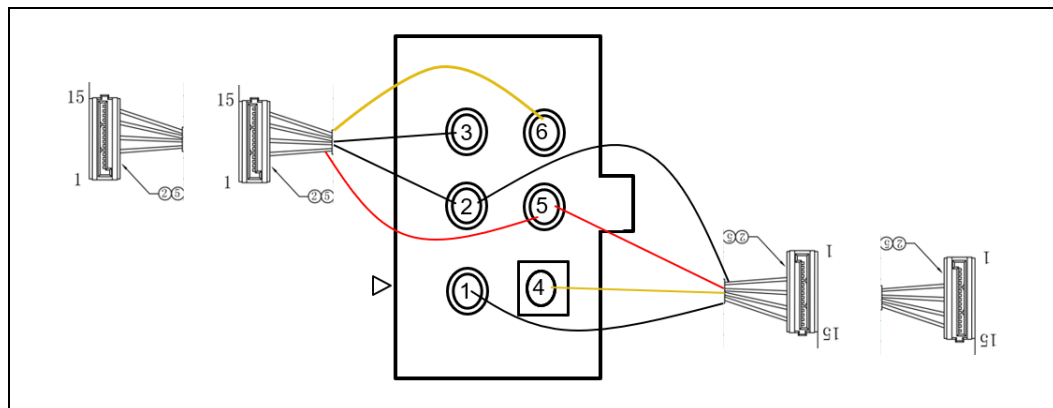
3 mm SATA Power 6 Pin Cable Connector – Traditional Cable Diagram
